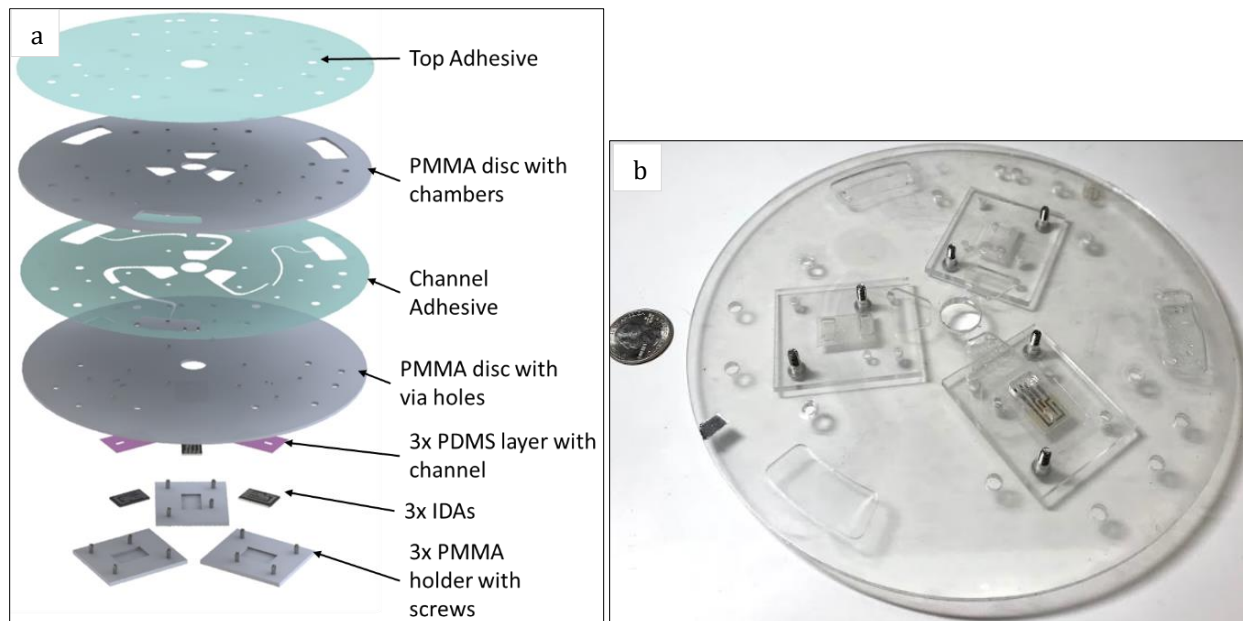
Components and assembly of the reusable disc. (a) Exploded view showing the different layers of the disc. (b) The assembled disc with platinum IDEAs.
